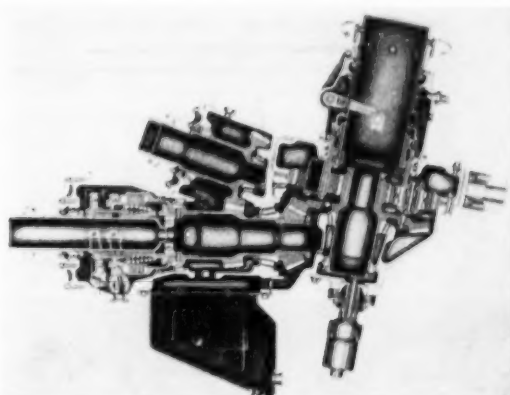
SECTION THROUGH HUP AFT TRANSMISSION AND CLUTCH
